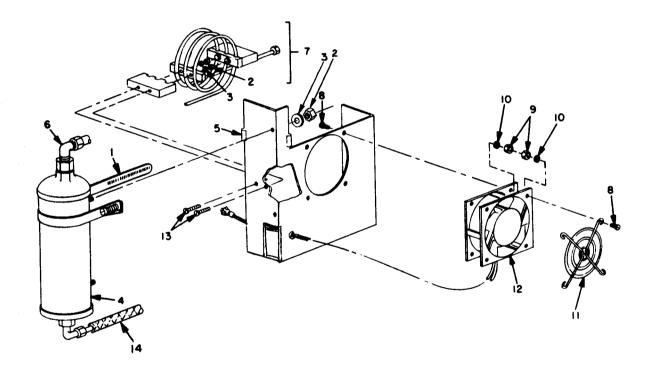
Dryer and Cooling Coil Assembly, Part. No. 88008
